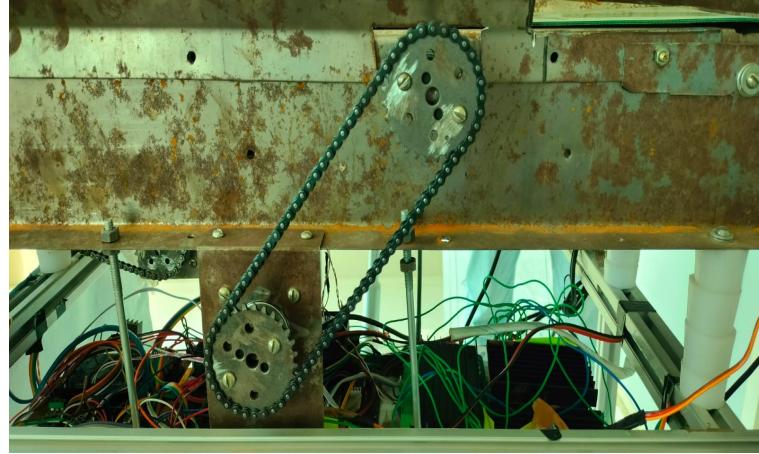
Figure showing Front view of the Gear-Chain mechanism
